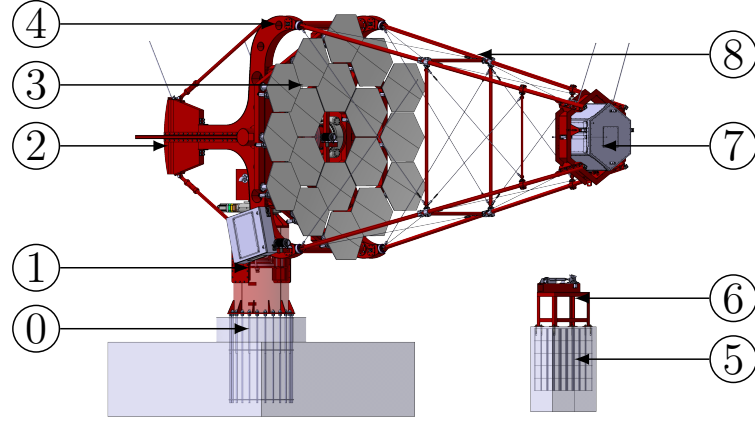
Structure drawing of the SST-1M telescope. (0) Foundation of the telescope support. (1) The telescope tower. (2) The counterweight. (3) Hexagonal mirrors. (4) Dish support structure. (5) Foundation of the docking station. (6) Docking station. (7) Camera. (8) Mast. Taken from [53].
